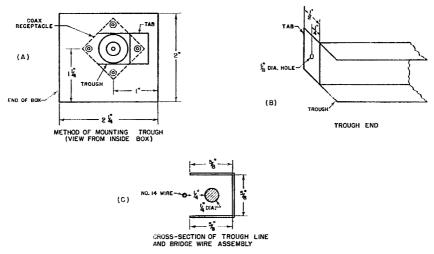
The drawing at A shows the method of mounting the trough to the end of the box. The trough is held in place by one of the screws that fastens the coax fitting to the box. Dimensions and constructional details of the trough ends are shown at B. A cross-sectional view of the trough, inner conductor, and bridge wire is shown at C.
